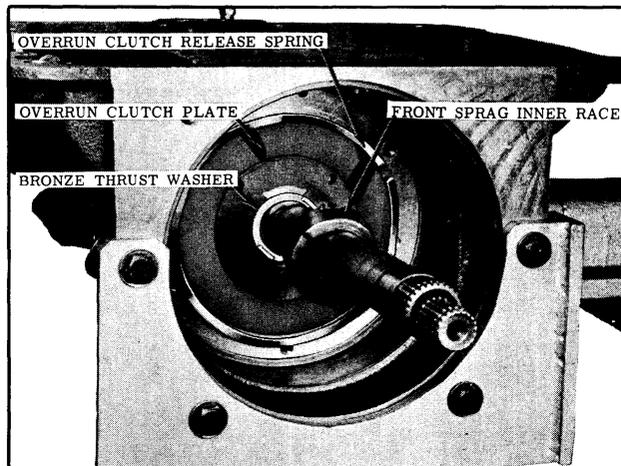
Removing Front Sprag and Overrun Clutch
